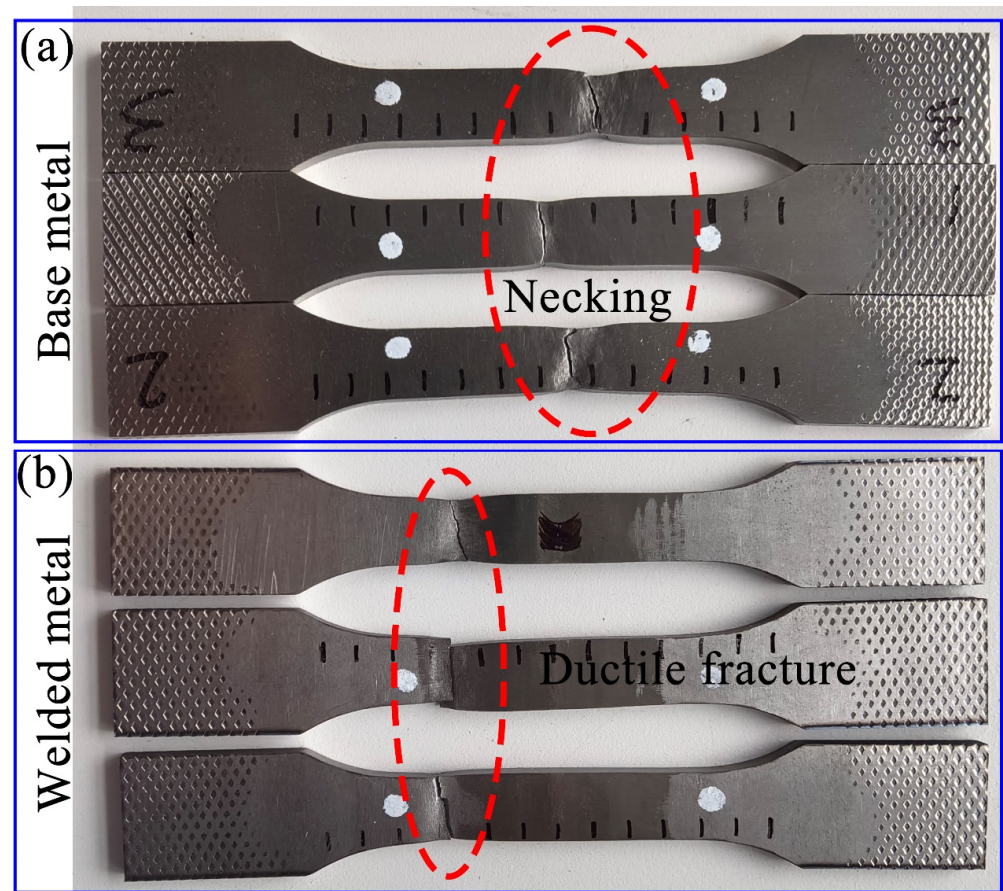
Macro-morphologies of tensile specimens after fracture. (a) base metal tensile specimens; (b) welded metal tensile specimens. Red circles indicated necking and the location of fracture. (Experimental parameters: $P = 3.0$ kW, $v = 1.2$ m/min, $F = +20$ mm).
